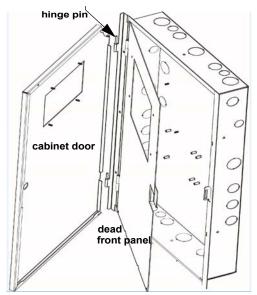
Cabinet Door and Dead Front Panel Removal 2.3 Board Layout
